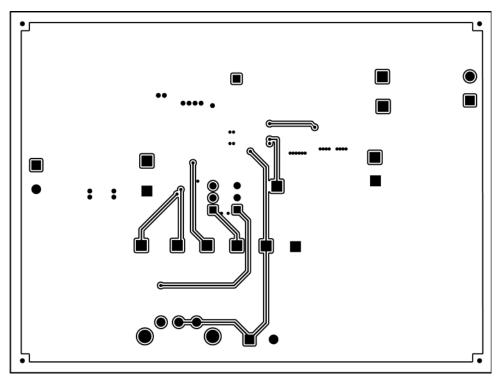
TPS92510EVM-011 Top Layer Assembly Drawing
